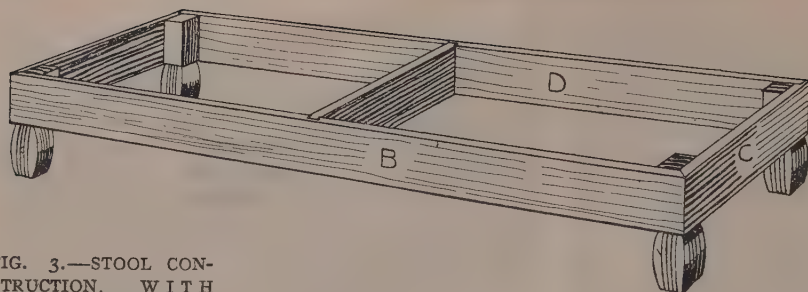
STOOL CONSTRUCTION, WITH ENLARGED DETAILS OF FEET AT RIGHT.
